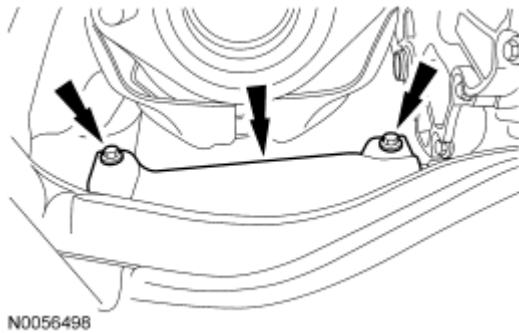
Identifying Power Steering Rack Shield & Bolts
